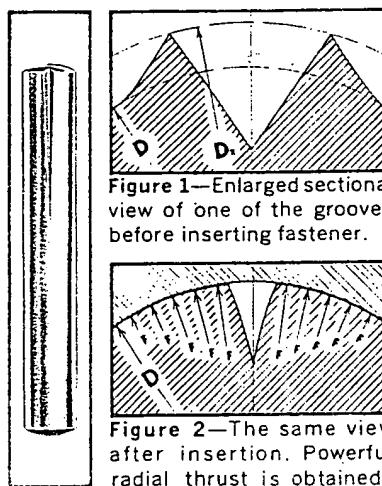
Enlarged sectional view of one of the grooves before inserting fastener.
